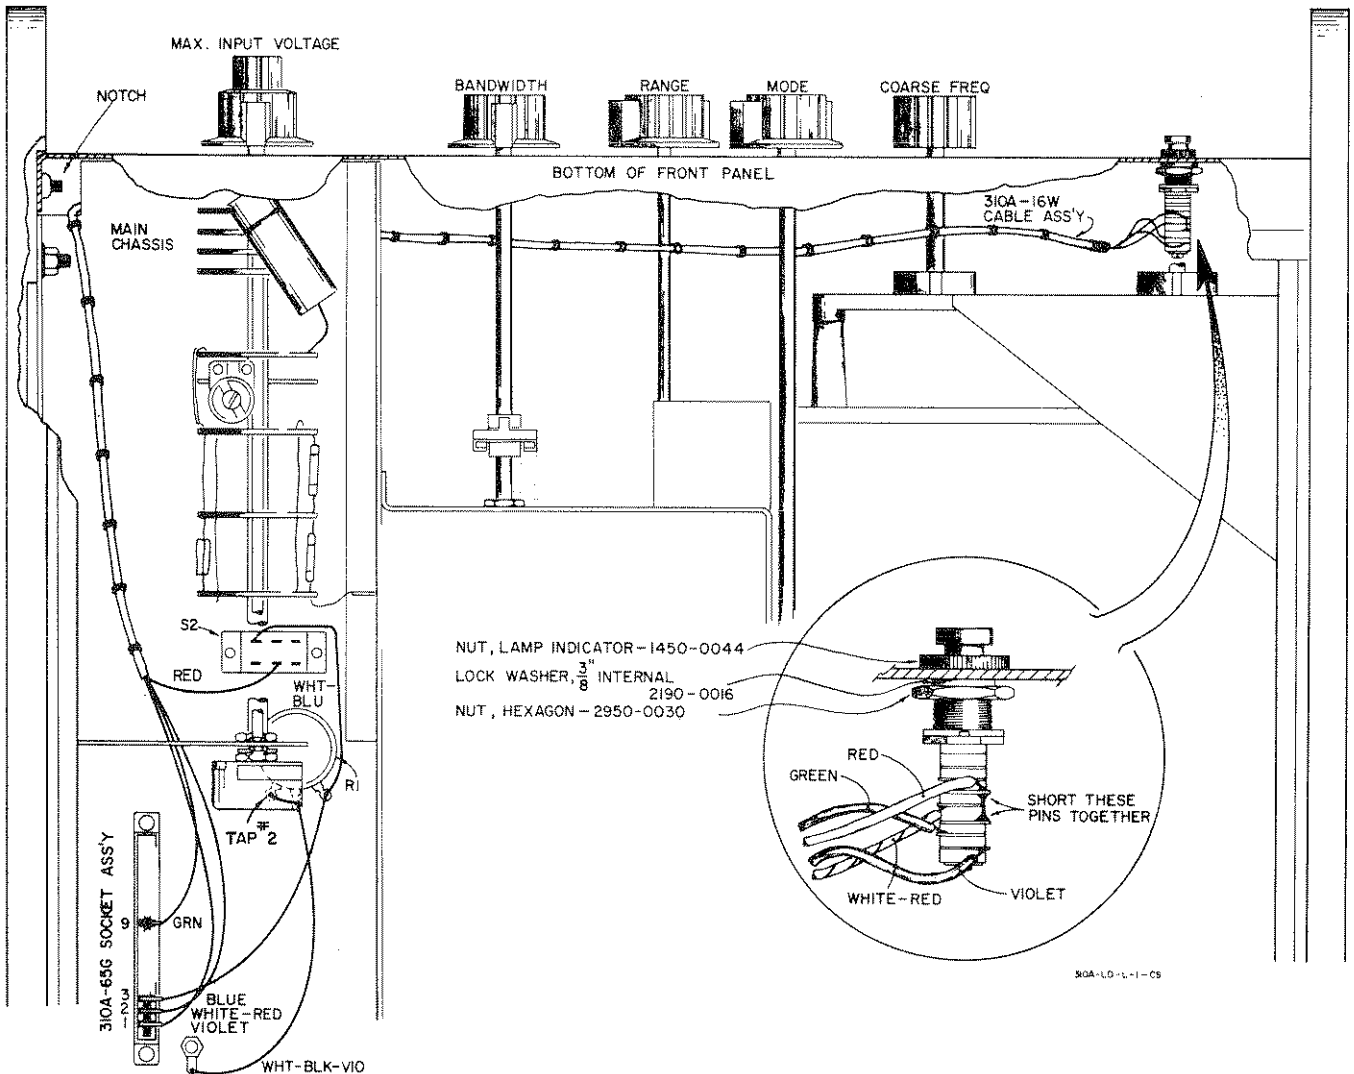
Model 310A, Pushbutton Switch Assembly, Wiring and Cable Layout
